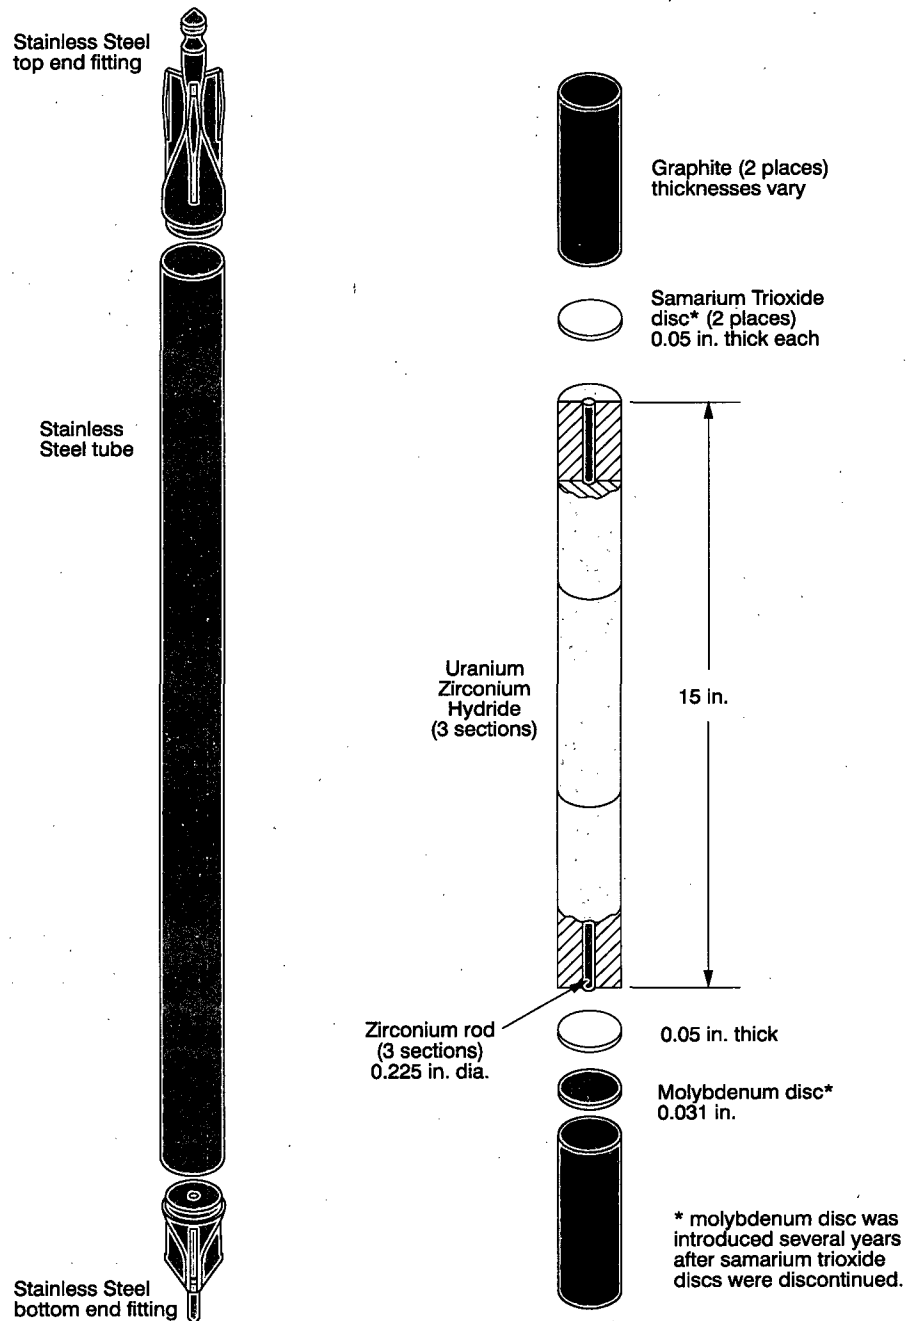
TRIGA Fuel Element (Stainless Steel Clad)
